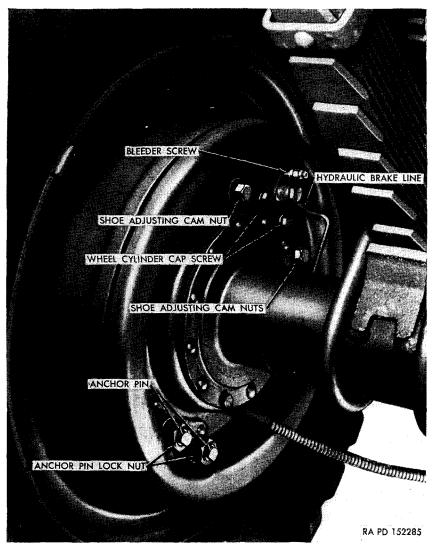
Brake shoe adjusting cam nuts used in making minor adjustment.
